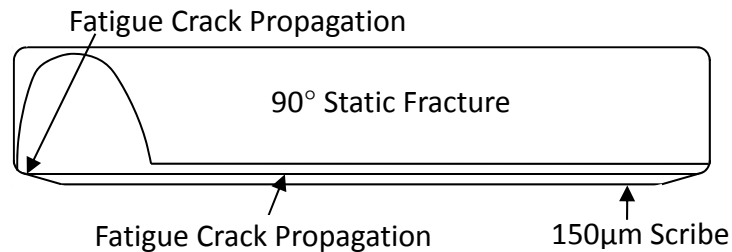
Illustration of fatigue crack development on fracture surface of 150 μm deep scribed sample with UPM peening treatment
